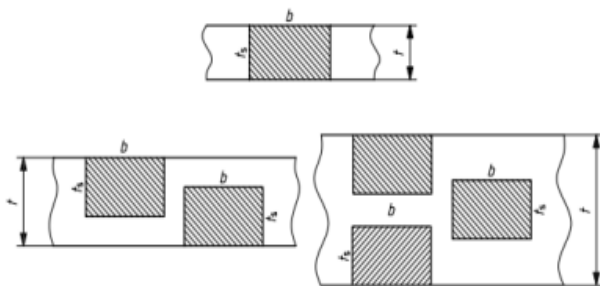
Root and face bend test specimens for a butt weld [10]
